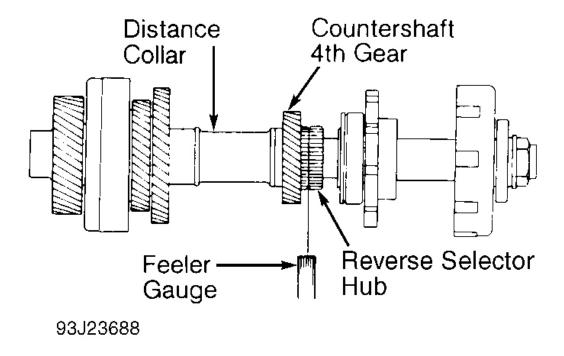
Checking Countershaft 4th Gear Clearance Courtesy of AMERICAN HONDA MOTOR CO., INC.
